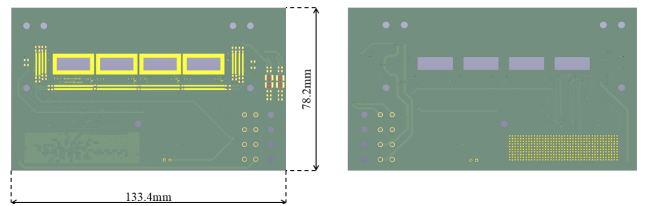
3D rendering of FMT MALTA2 Quad Module FPC prototype. The front view is shown in the left and the back view is shown in the right.
